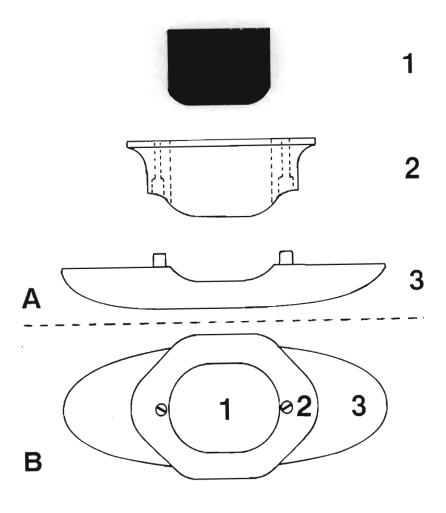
Removable cannula: (A) exploded side view, (B) plan view; (1) rubber plug, (2) cannula, (3) sleeve. Construction material: poly oxymethylene.
